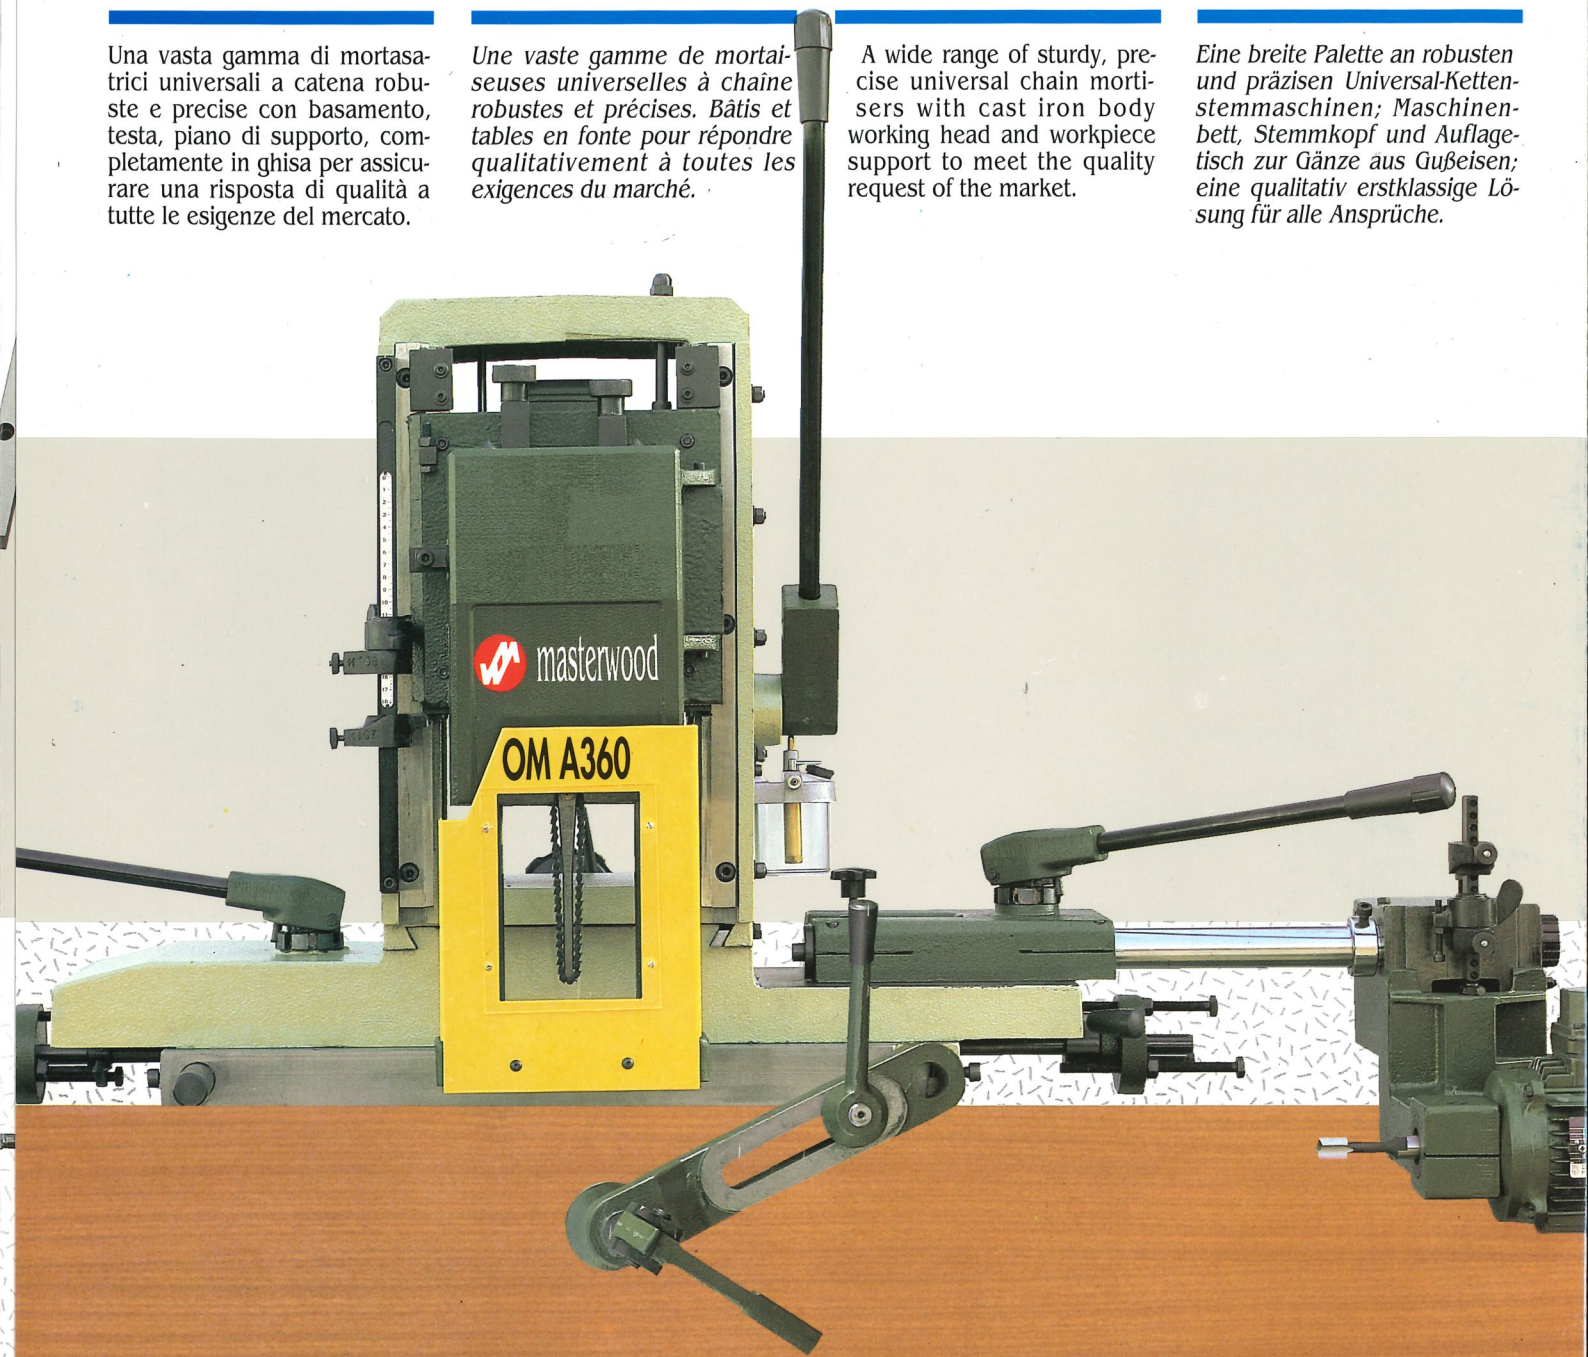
with horizontal boring unit attached to the machine for key and knob holes execution in the door lock operations.
